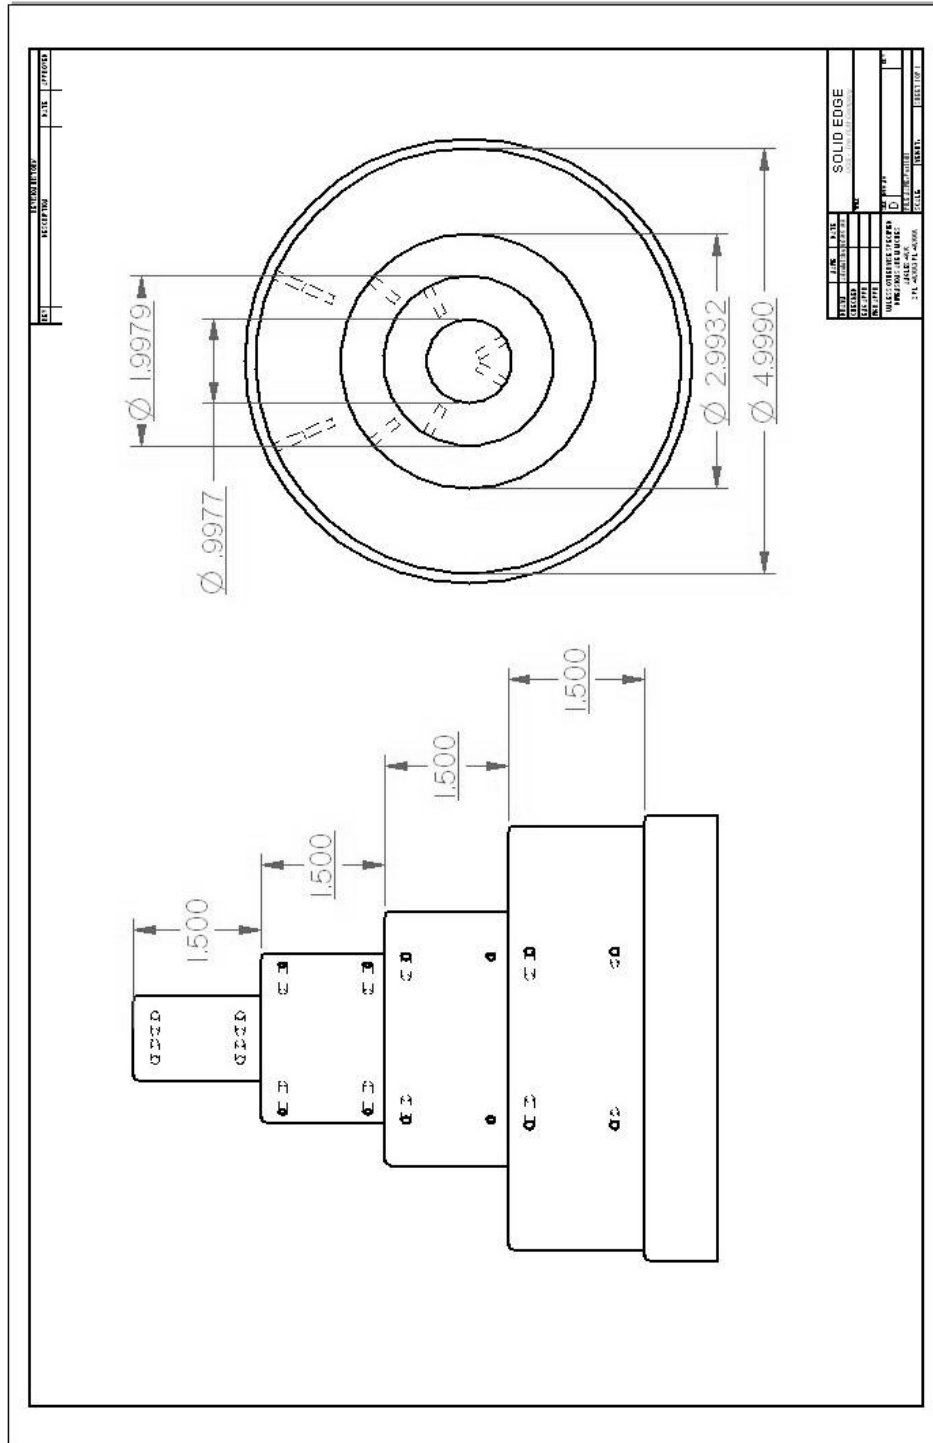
Physical dimensions of fixture used to produce externally applied tensile stress.
